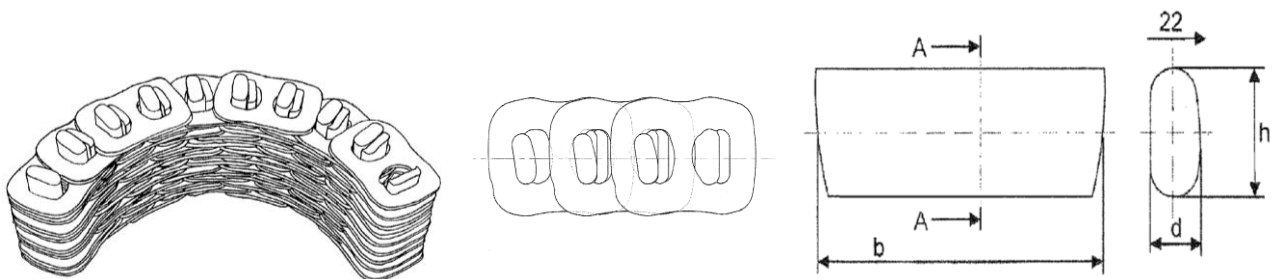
Basic structure of a rocker assembly chain; configuration and details [3]
